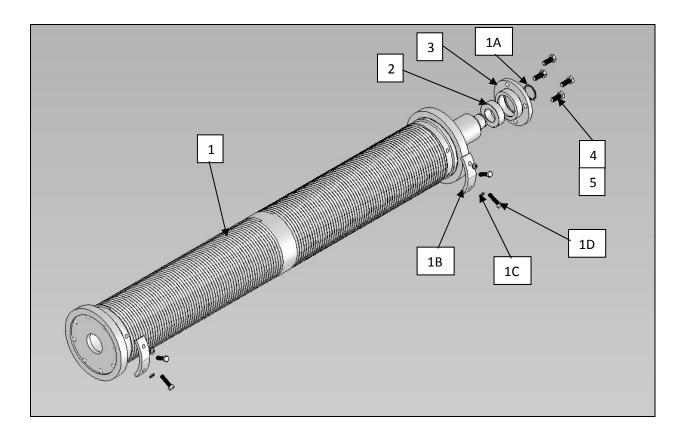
, WHEEL AND IDLER AXLE ASSEMBLY
